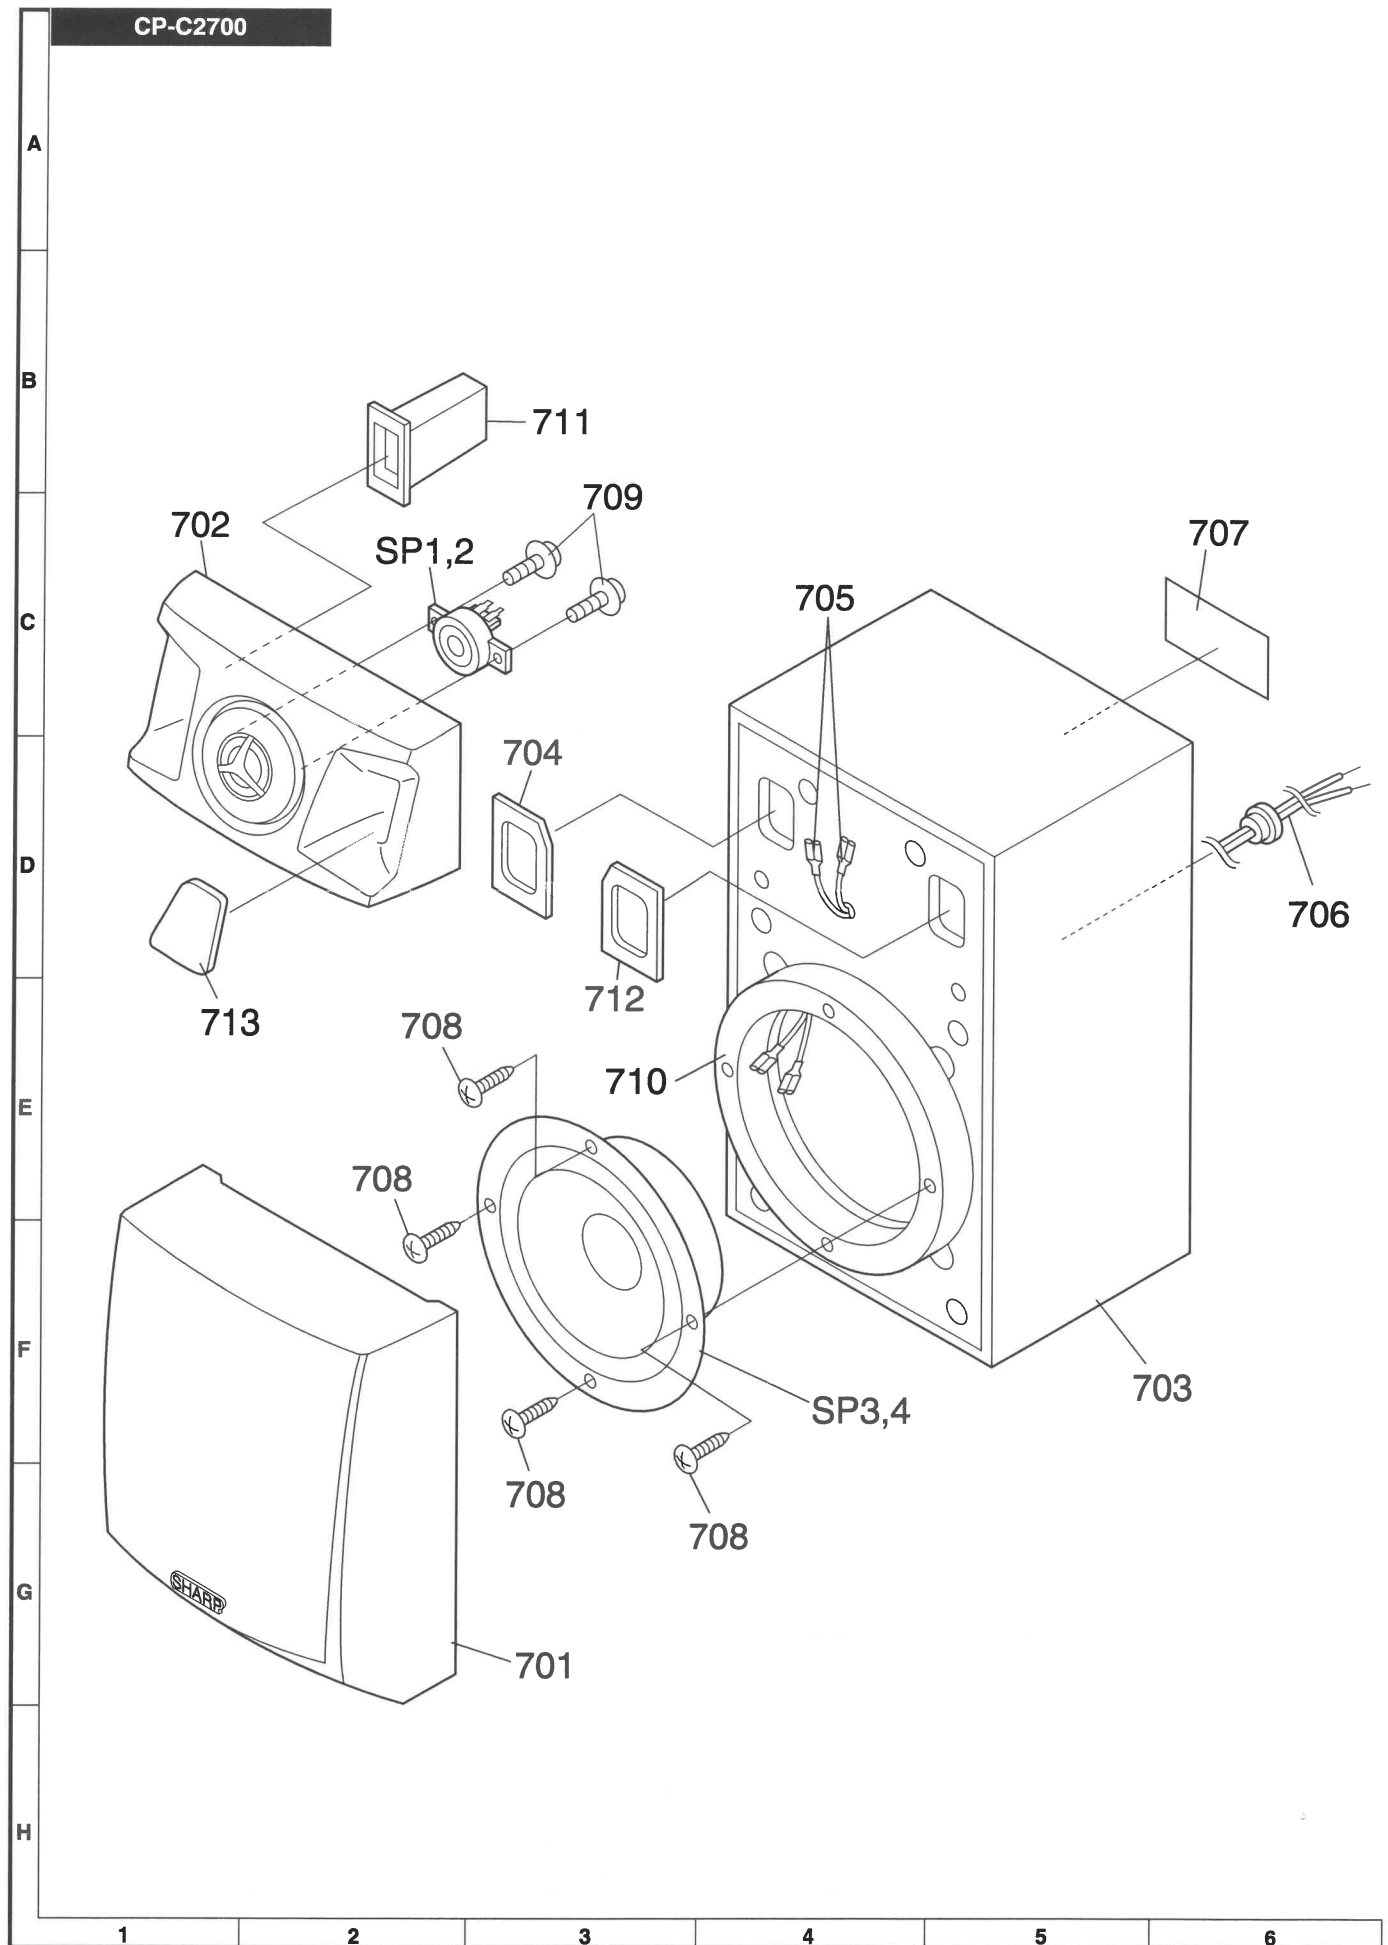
SPEAKER EXPLODED VIEW (3/3)
